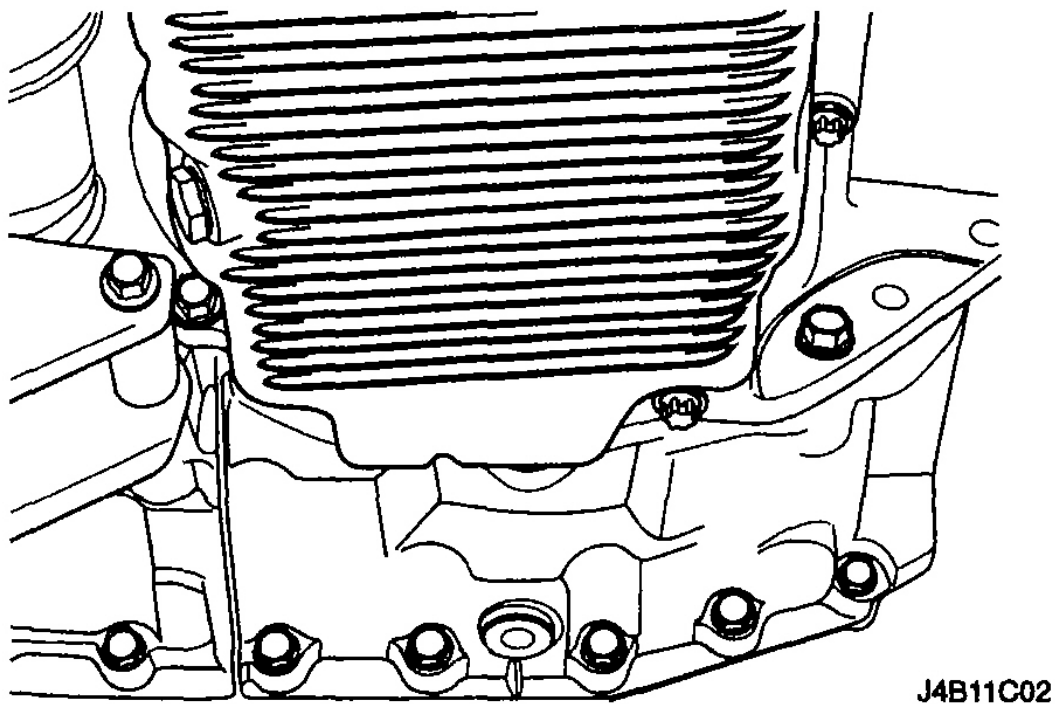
Installing Oil Pan Flange-To-Transaxle Bolts
